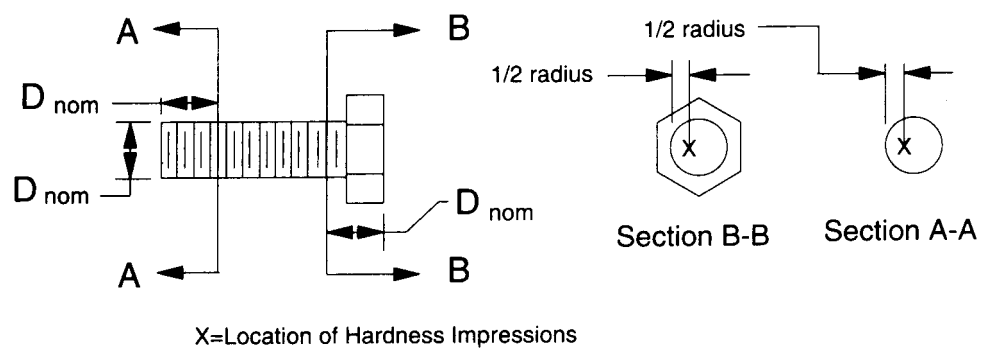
HARDNESS TEST LOCATIONS FOR BOLTS IN A DISPUTE
